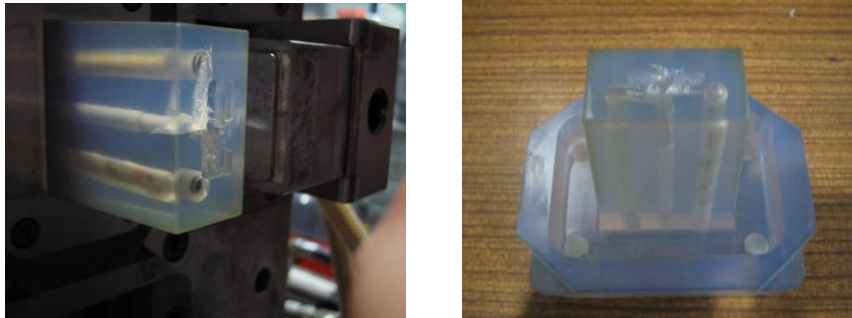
Runner system of the Somos 11122 resin core moulding blocks after injections
